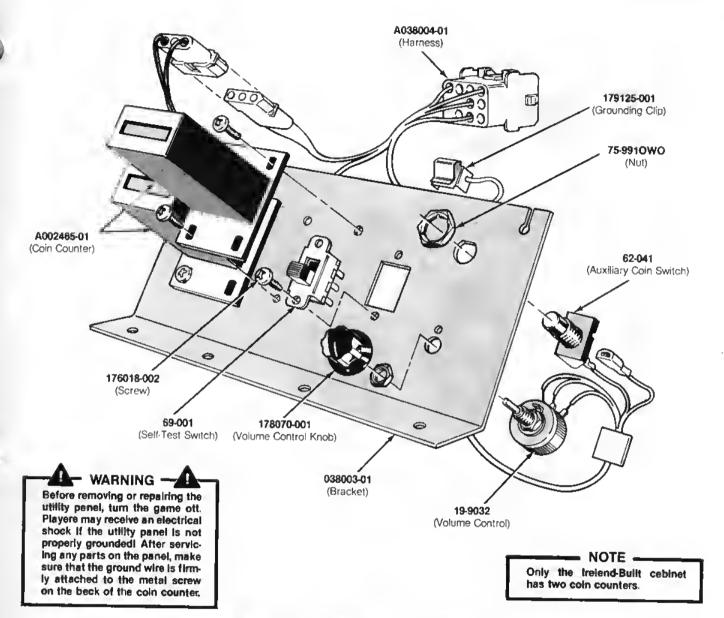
Utility Panel Assembly A038002-01 & -02 G Parts List
